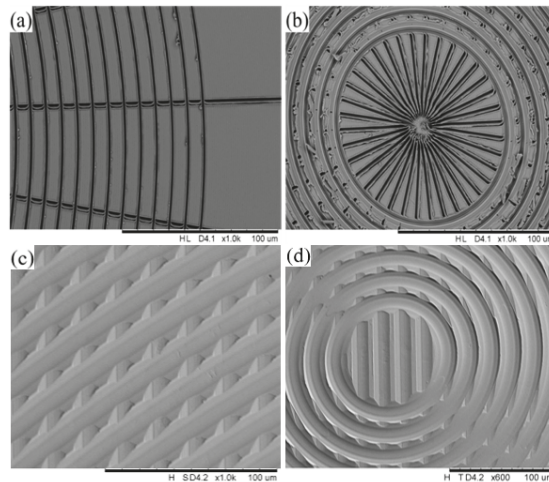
Comparing workpiece machined surfaces by using the sharp tip type and the arc tip type of the diamond tool. Tool wear evolution of the sharp tip type of diamond tool: (a) initial machining quality of the workpiece surface by the sharp tip; (b) workpiece surface machining quality after tool wear of the sharp tip. Machining quality of the workpiece surface by the arc tip; (c) workpiece surface machining quality in the adjacent area; and (d) workpiece surface machining quality in the central area.
